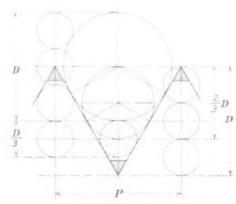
CHECKING ANGLE ON CO-DEG. THREADS WITH STANDARD BEST WIRES
